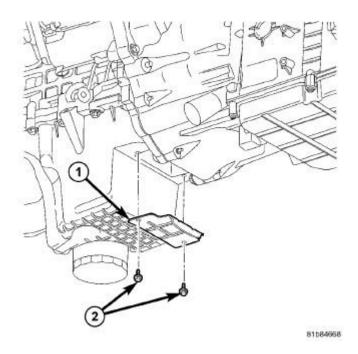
Engine Cradle Courtesy of CHRYSLER LLC
